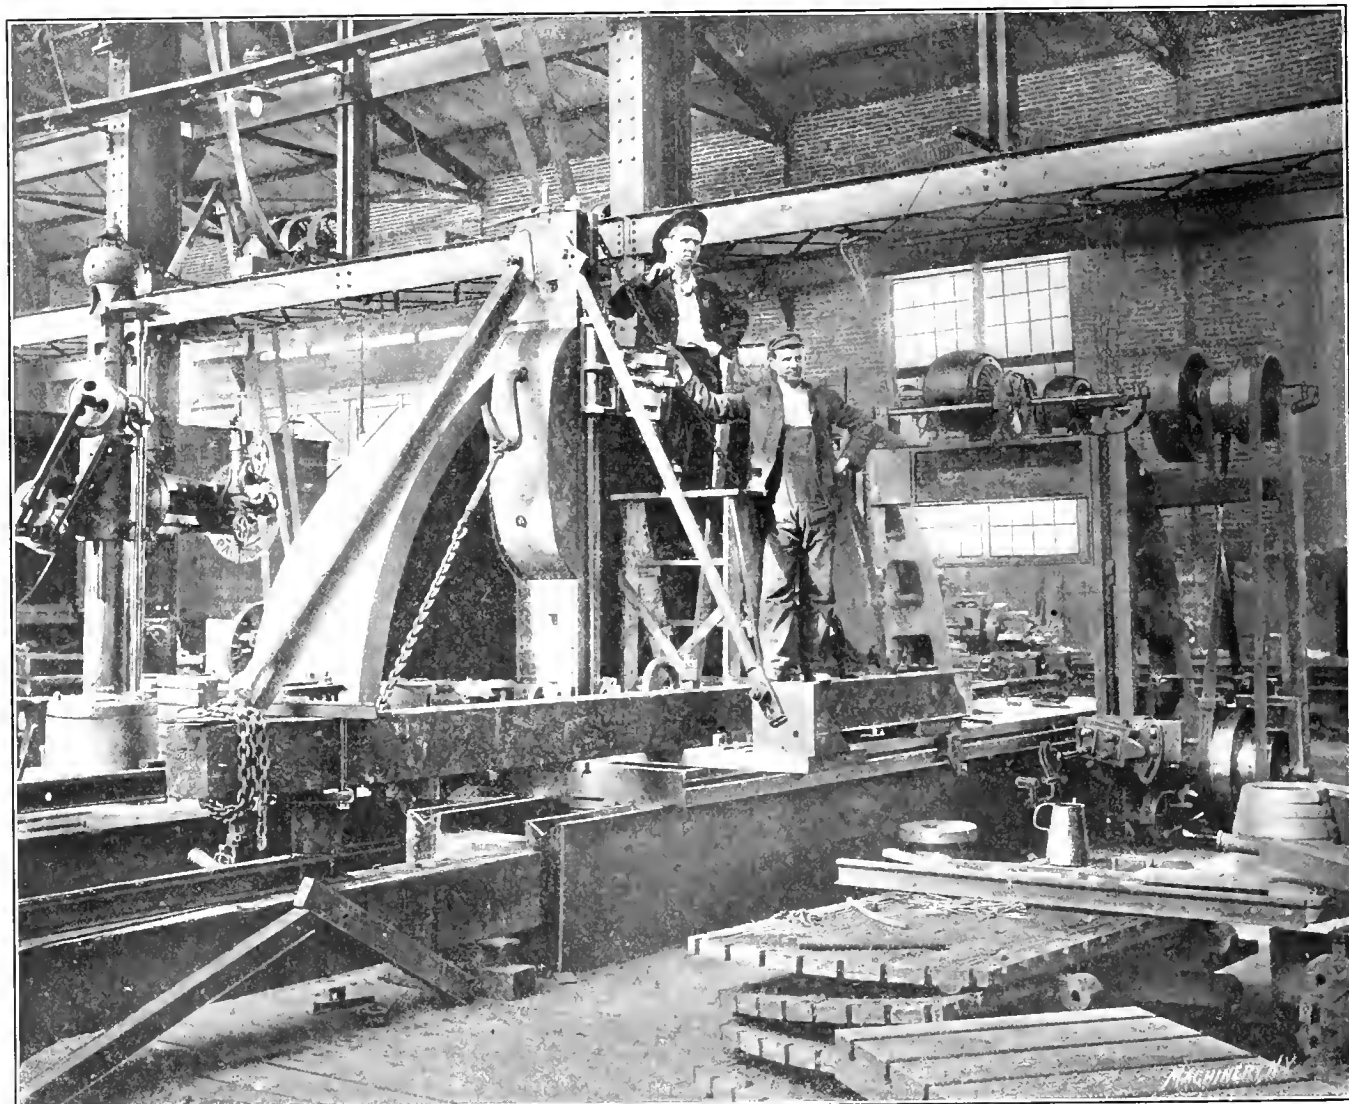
View showing how the Large Casting Illustrated in Fig 2 was planed on a 4-foot Planer.
